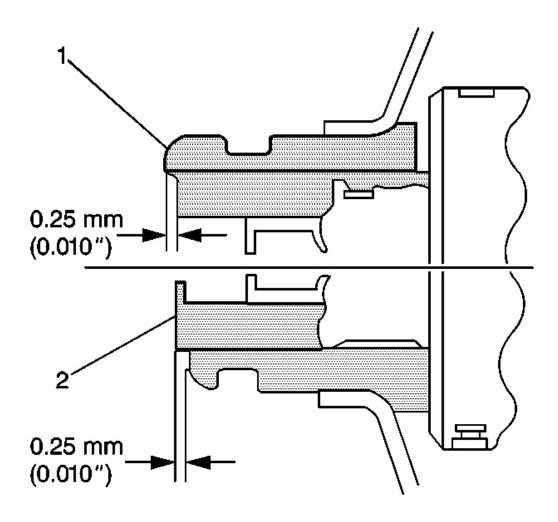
Checking Power Steering Pump Pulley Installed Depth Courtesy of GENERAL MOTORS CORP.
